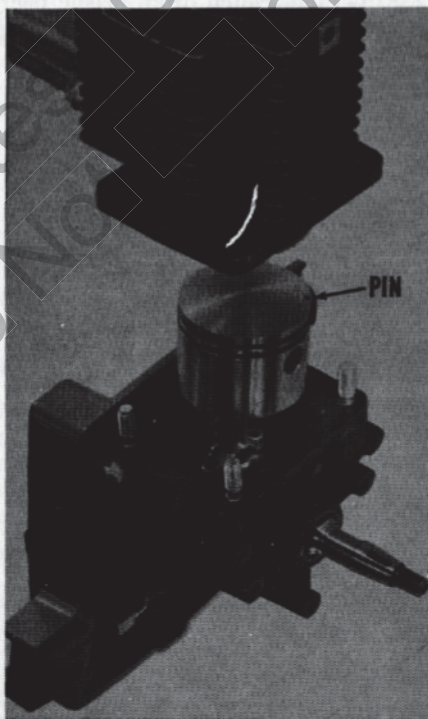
Piston and connecting rod assembly can be removed from crankpin after removing cylinder from crankcase. Note piston ring locating pin on intake side of piston.
